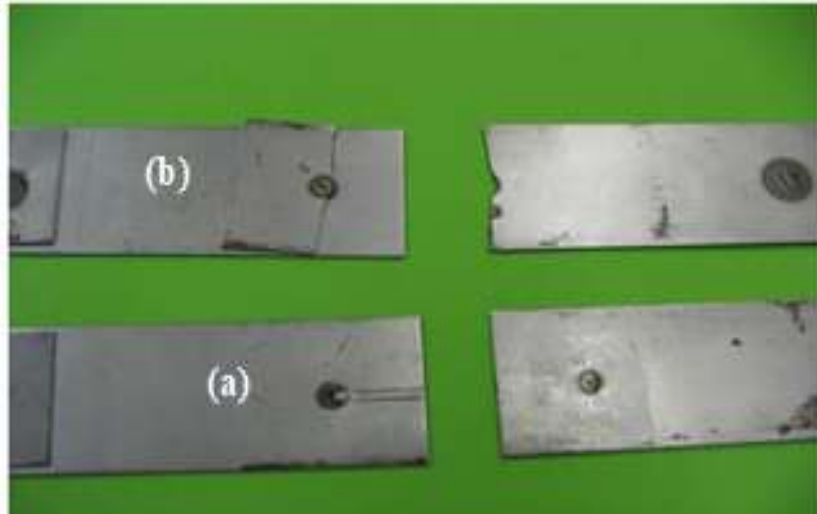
Specimens spot welded and broken according to two distinct modes of failure (a) by cracking of one of the two sheets, (b) by shearing of the core of the welded point.
